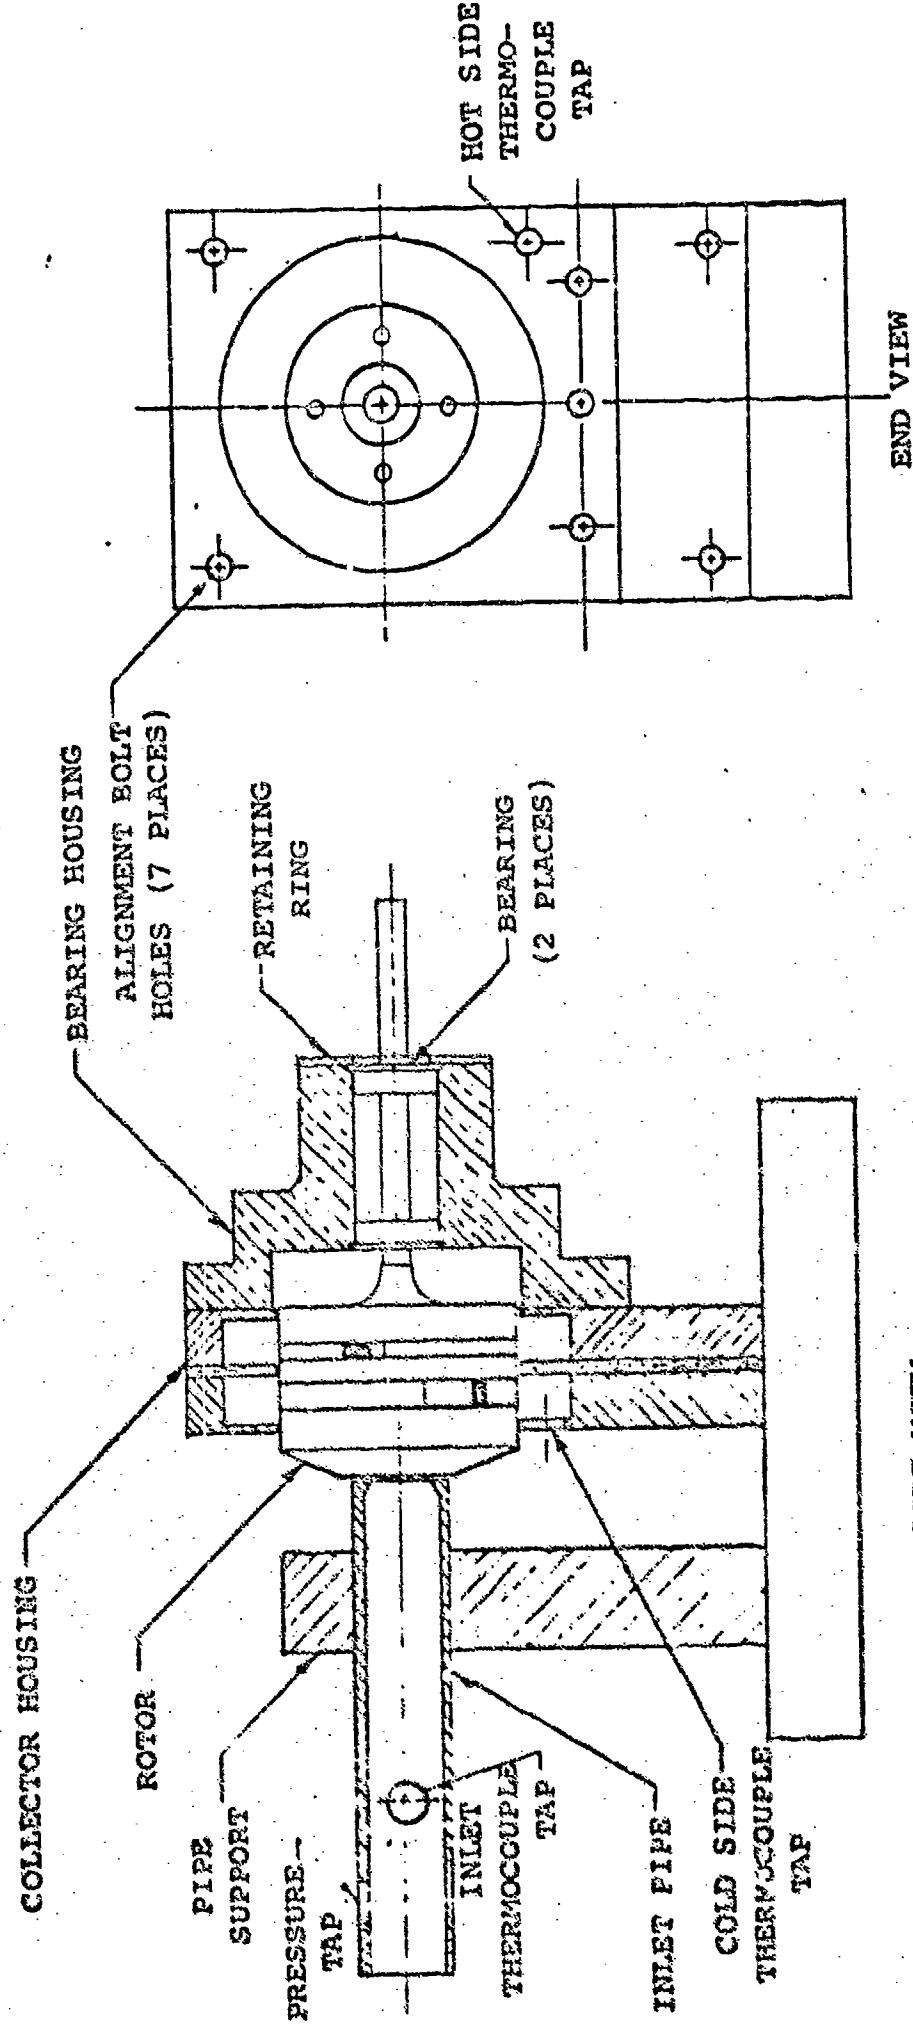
ASSEMBLY DRAWING OF A SINGLE ROTOR INTERNAL ENERGY SEPARATOR AS
